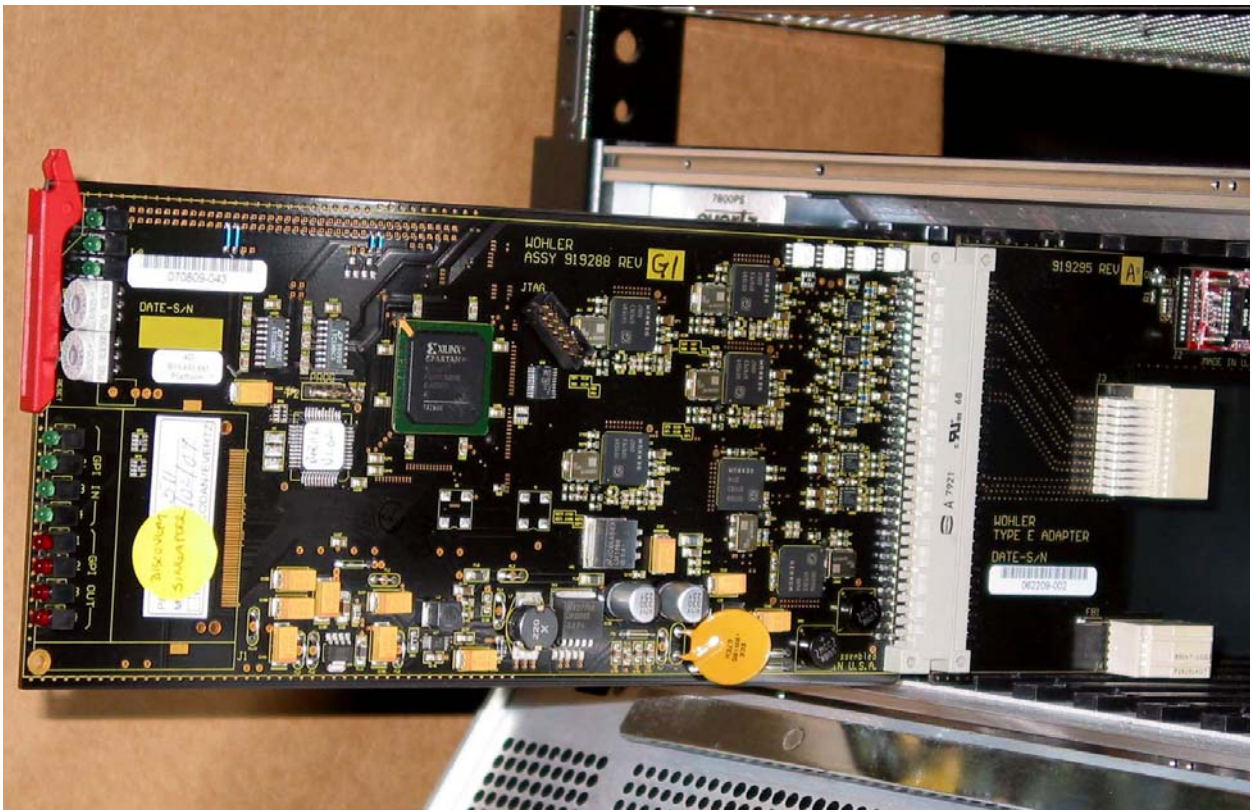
Attaching the External Piece of an Evertz Adaptor to the Frame
